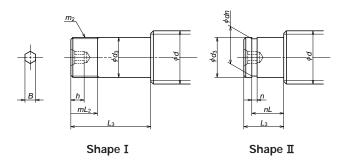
Standard shaft end configuration (opposite to the drive side)
